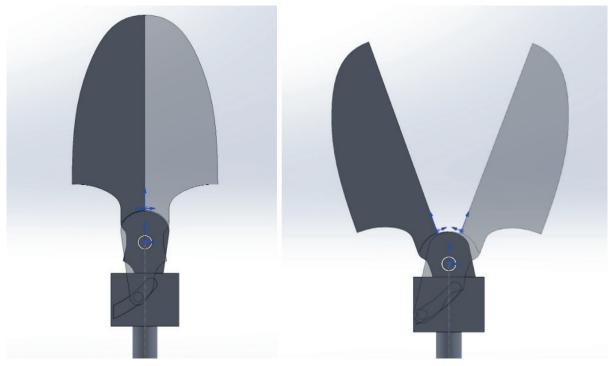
Solidworks images showing the linear cam mechanism in the closed and open state
